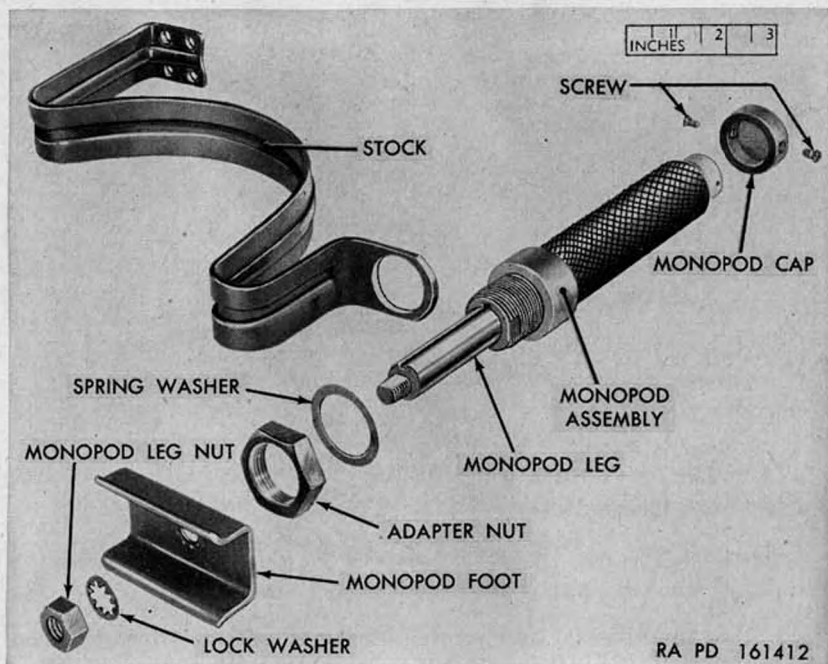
Monopod and stock parts of launcher M20B1—exploded view.
